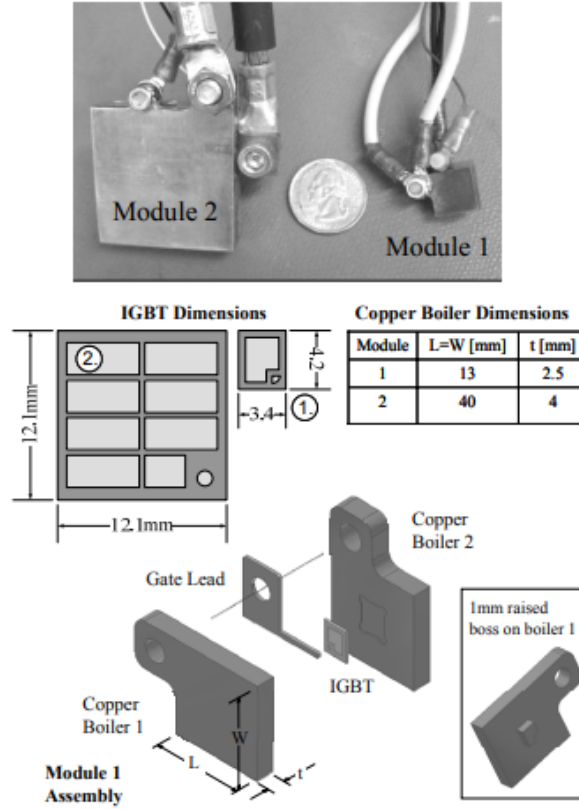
IGBT, module assembly and copper boiler dimensions [15]
